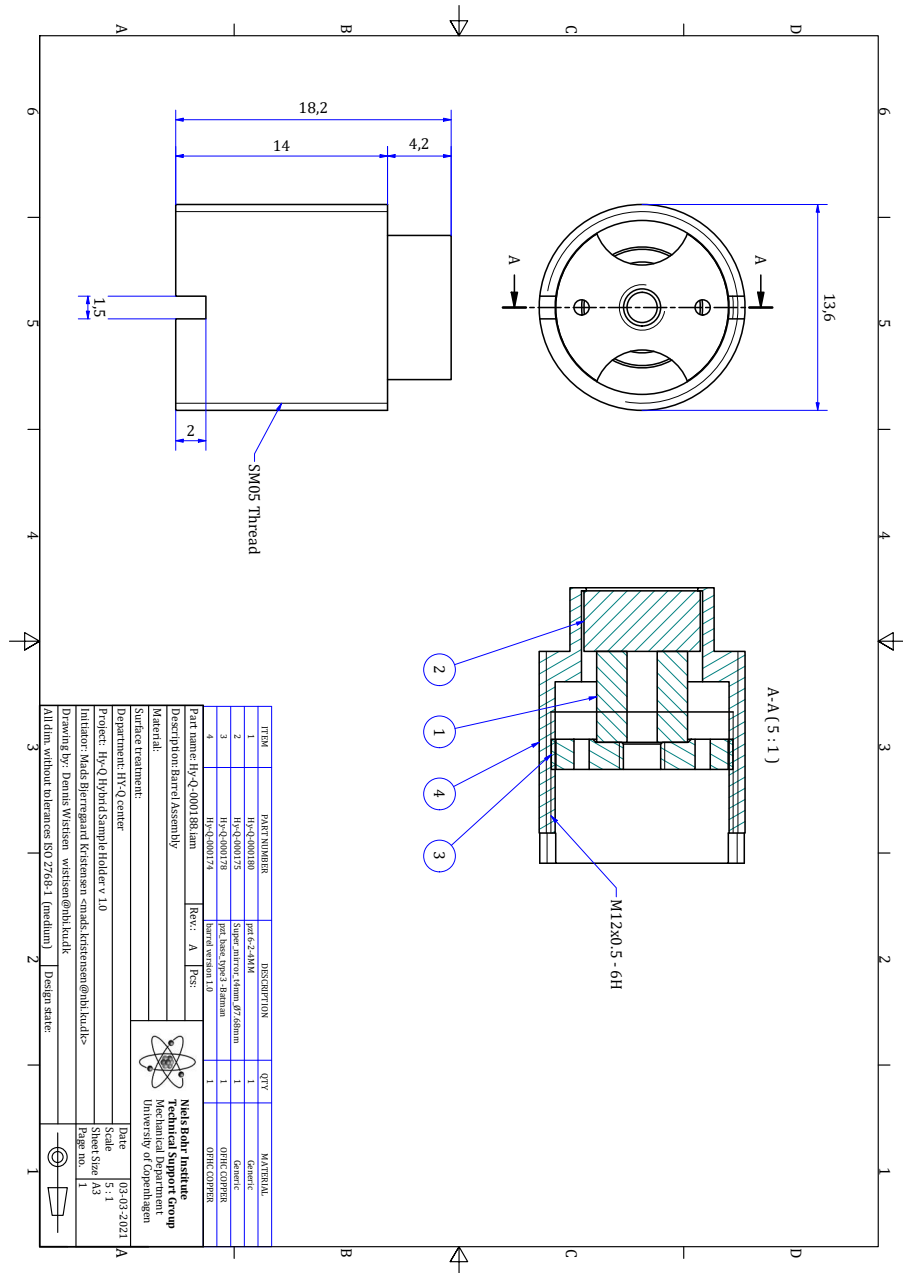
Mirror holder barrel schematic. The "barrel" (4) holds the mirror (2), which together with a piezo (1) is clamped with a custom screw (3).
